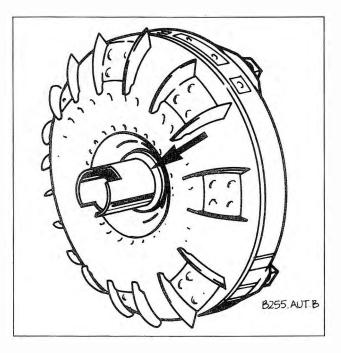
Torque converter removed from engine showing bearing surface (arrow) that should be checked for scoring or wear.
